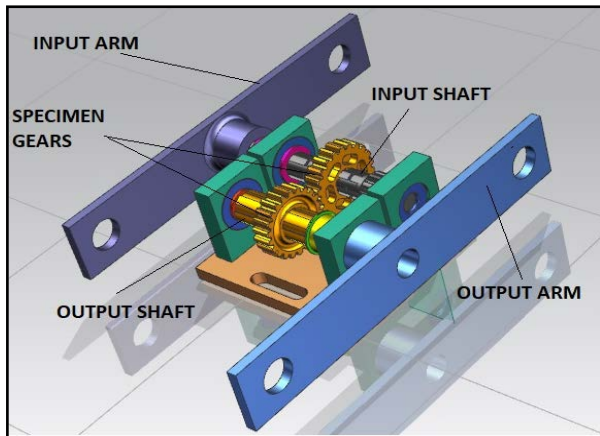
Gear Testing Fixture in Three-Dimensional View
